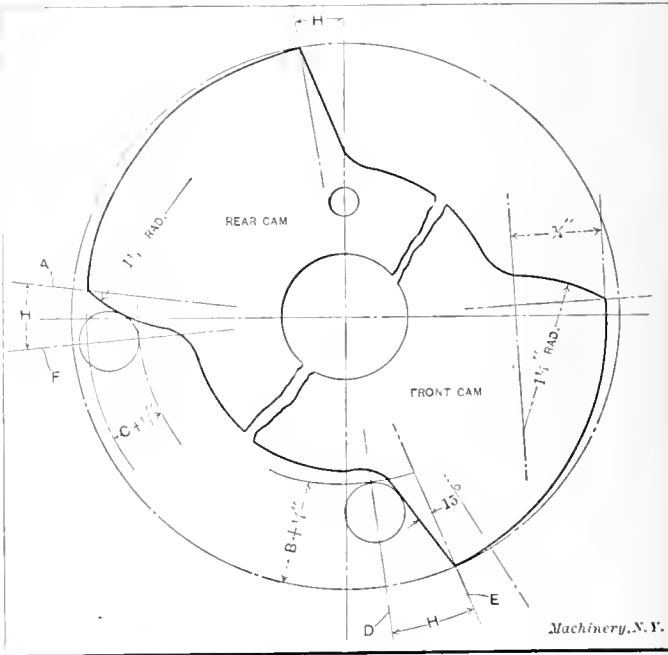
Method of Determining Clearance on Cross-slide Cams
